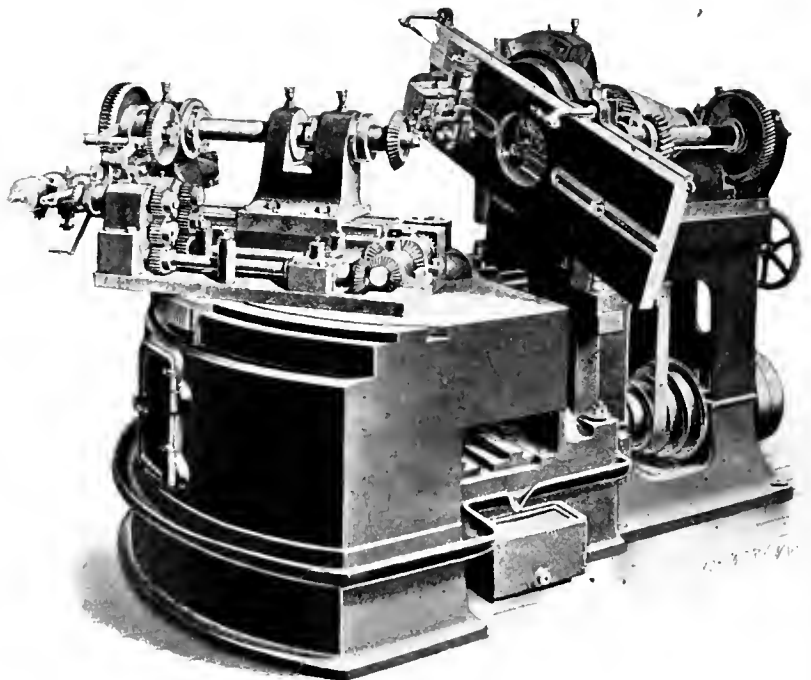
The Ernault Bevel Gear Generating Machine, which cuts Gears with Helical Teeth.
